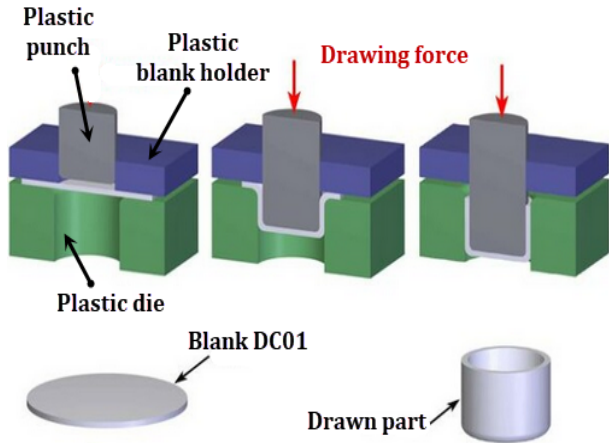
Schematic view of deep drawing process with plastic tool elements [2]
